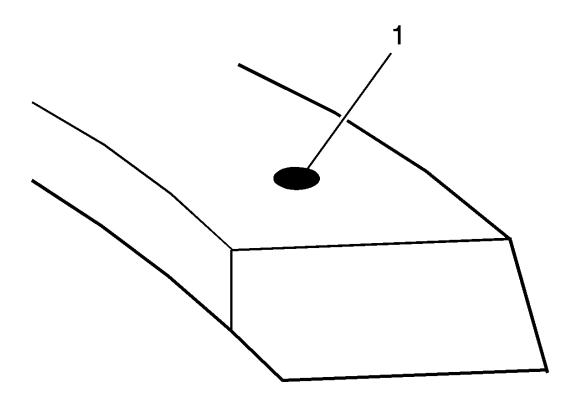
View Of Oil Control Piston Rings Courtesy of GENERAL MOTORS CORP.
